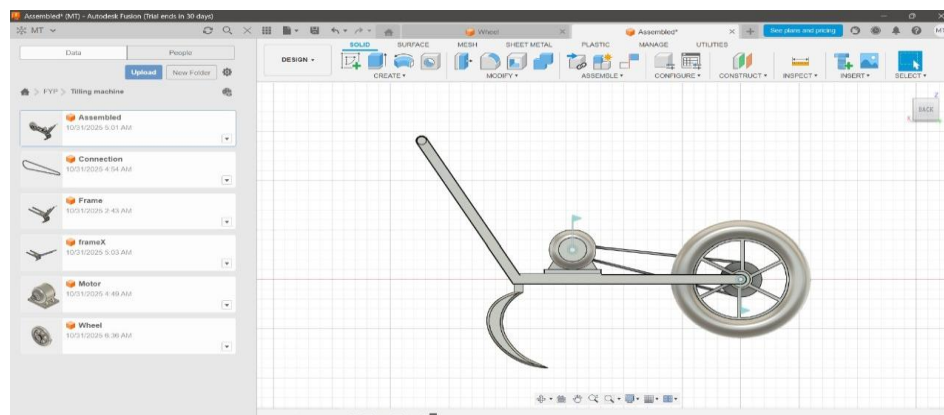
Side view of the portable tilling machine showing frame structure, motor position, wheel alignment, and tilling blade placement.
